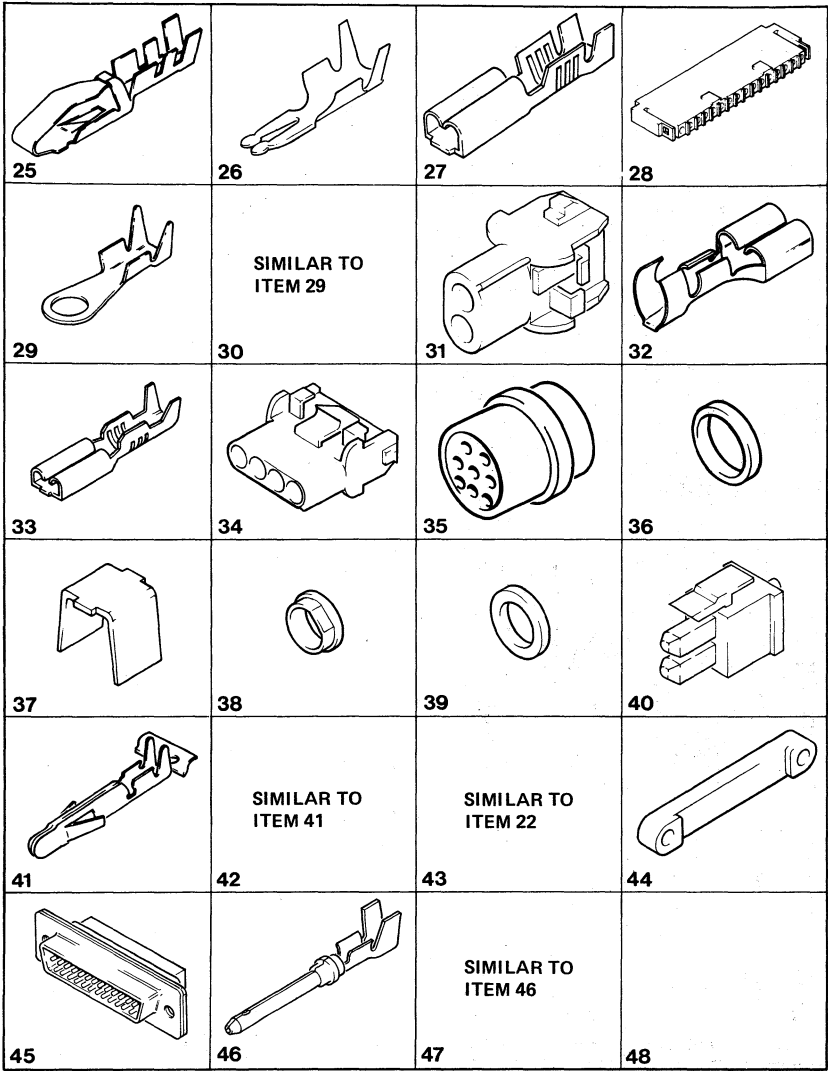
(Sheet 2 of 2). Jumper and Cable
